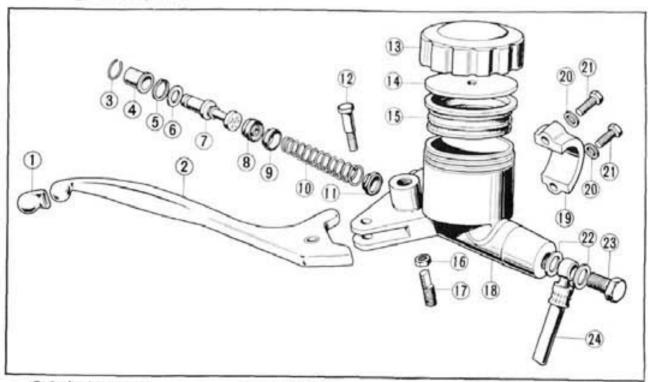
(1) Oil bolt 2 Master cylinder
